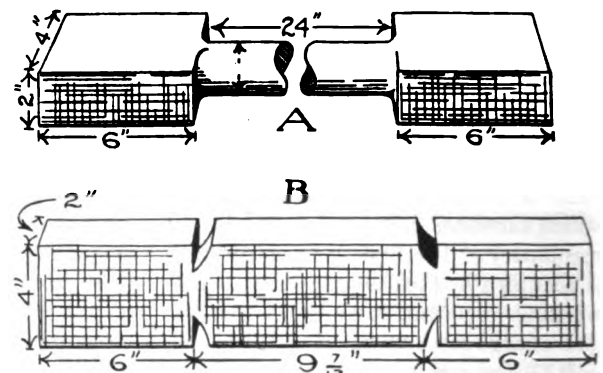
CALCULATING THE SEPARATE PARTS IN IRREGULAR SHAPED FORGINGS.
